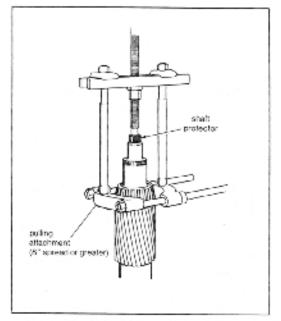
Pulling Rear Pinion Shaft Bearing.
